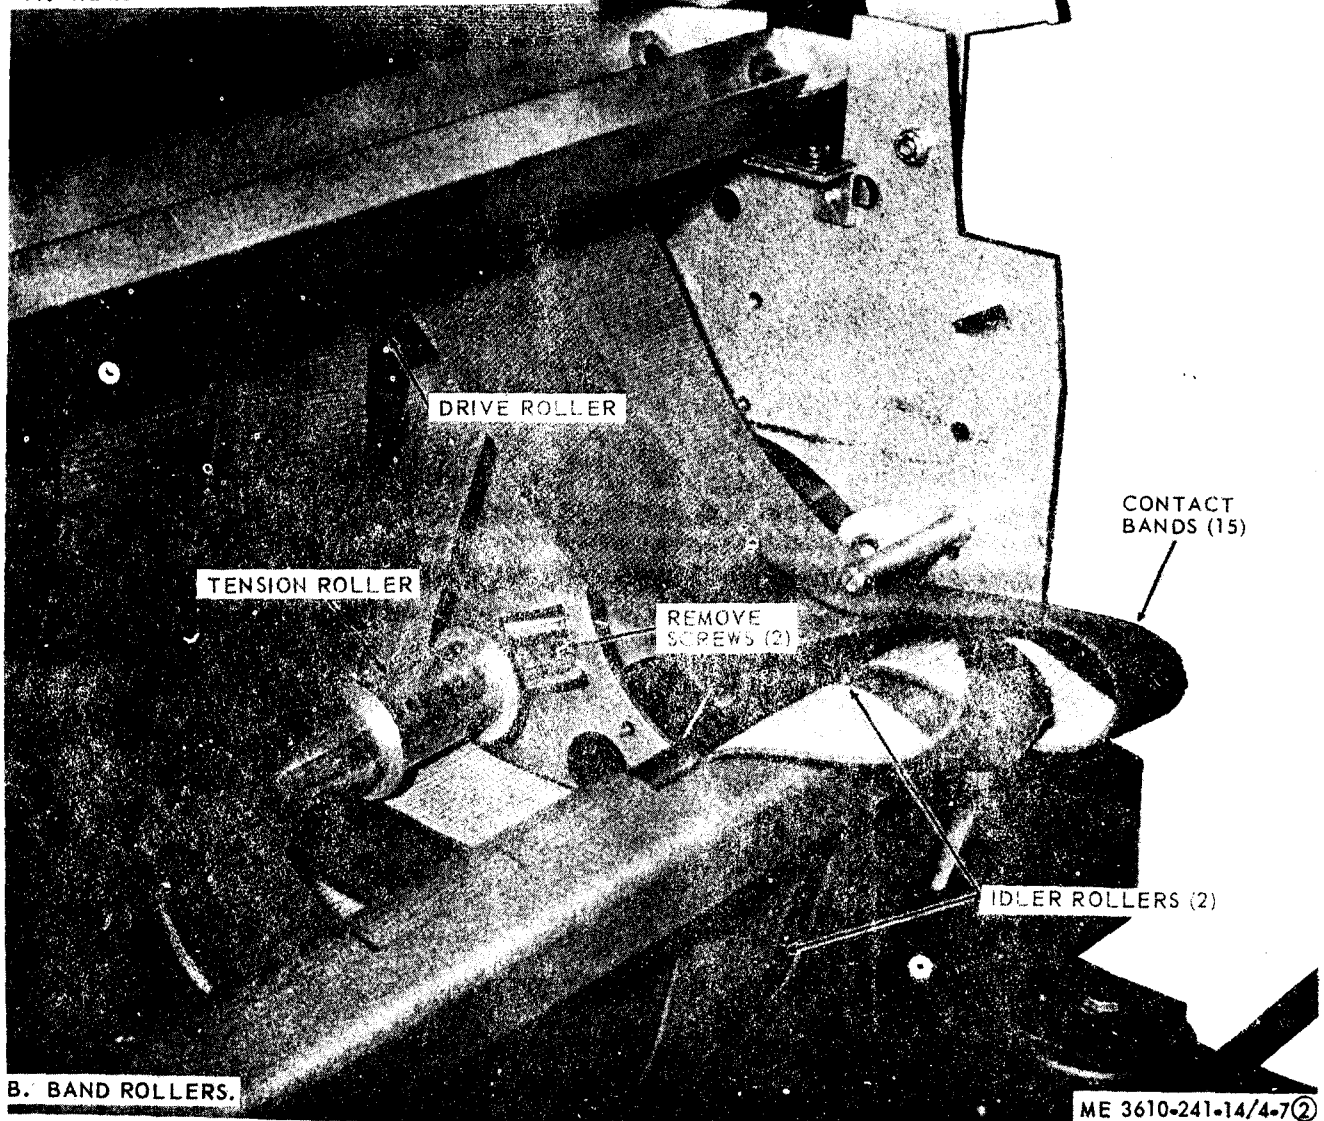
Contact bands, removal and installation (sheet 2 of 2).
